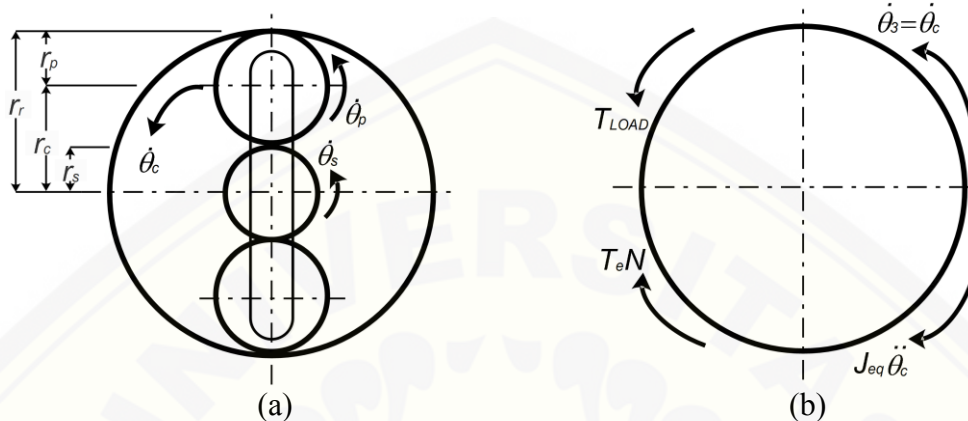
(a) Configuration model of the planetary gear; and (b) Free body diagram of the planetary gear and the generator
